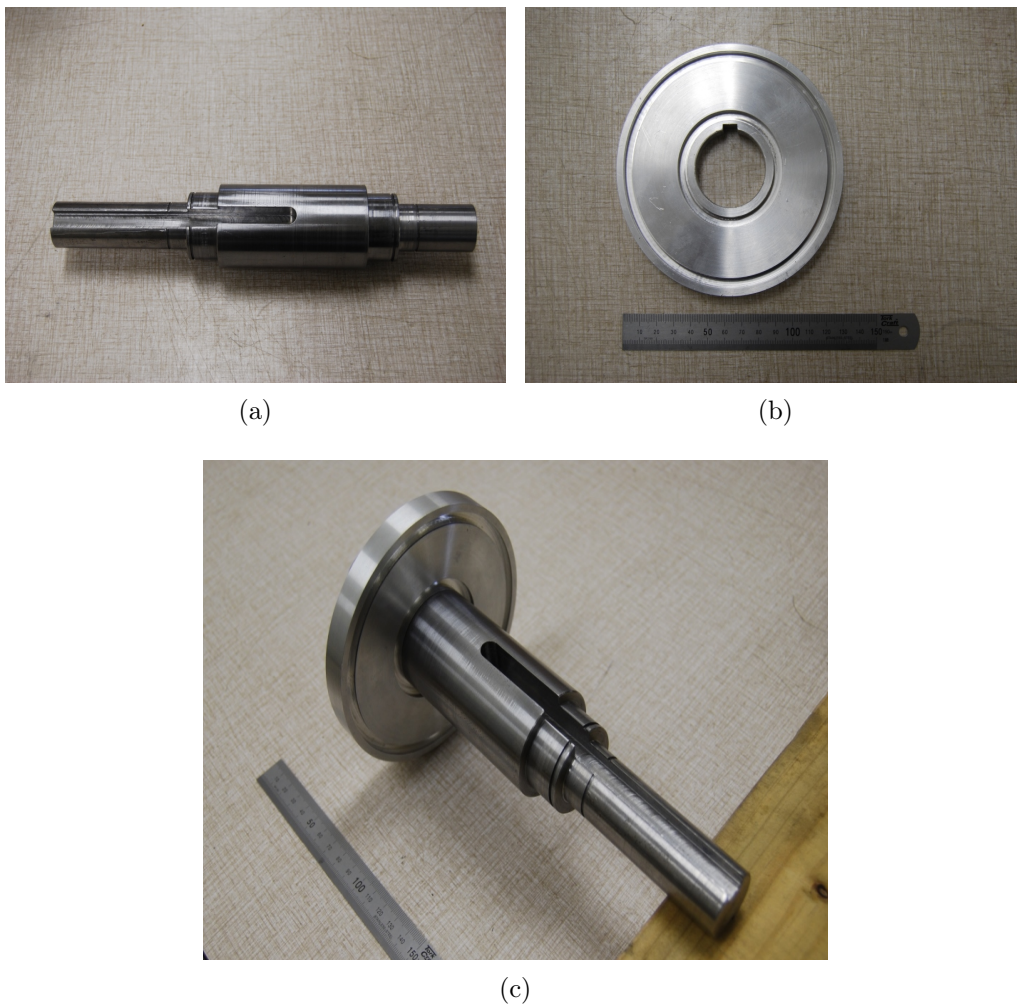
Shaft and secondary side support structure: (a) Transformer's shaft, (b) secondary side end plate. (c) End plate fixed to the shaft, ready for lamination placement
